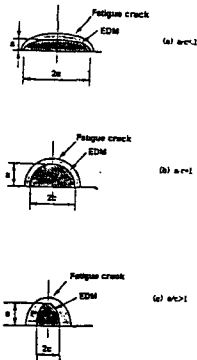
Fatigued Crack Shape According to EDM Notches
